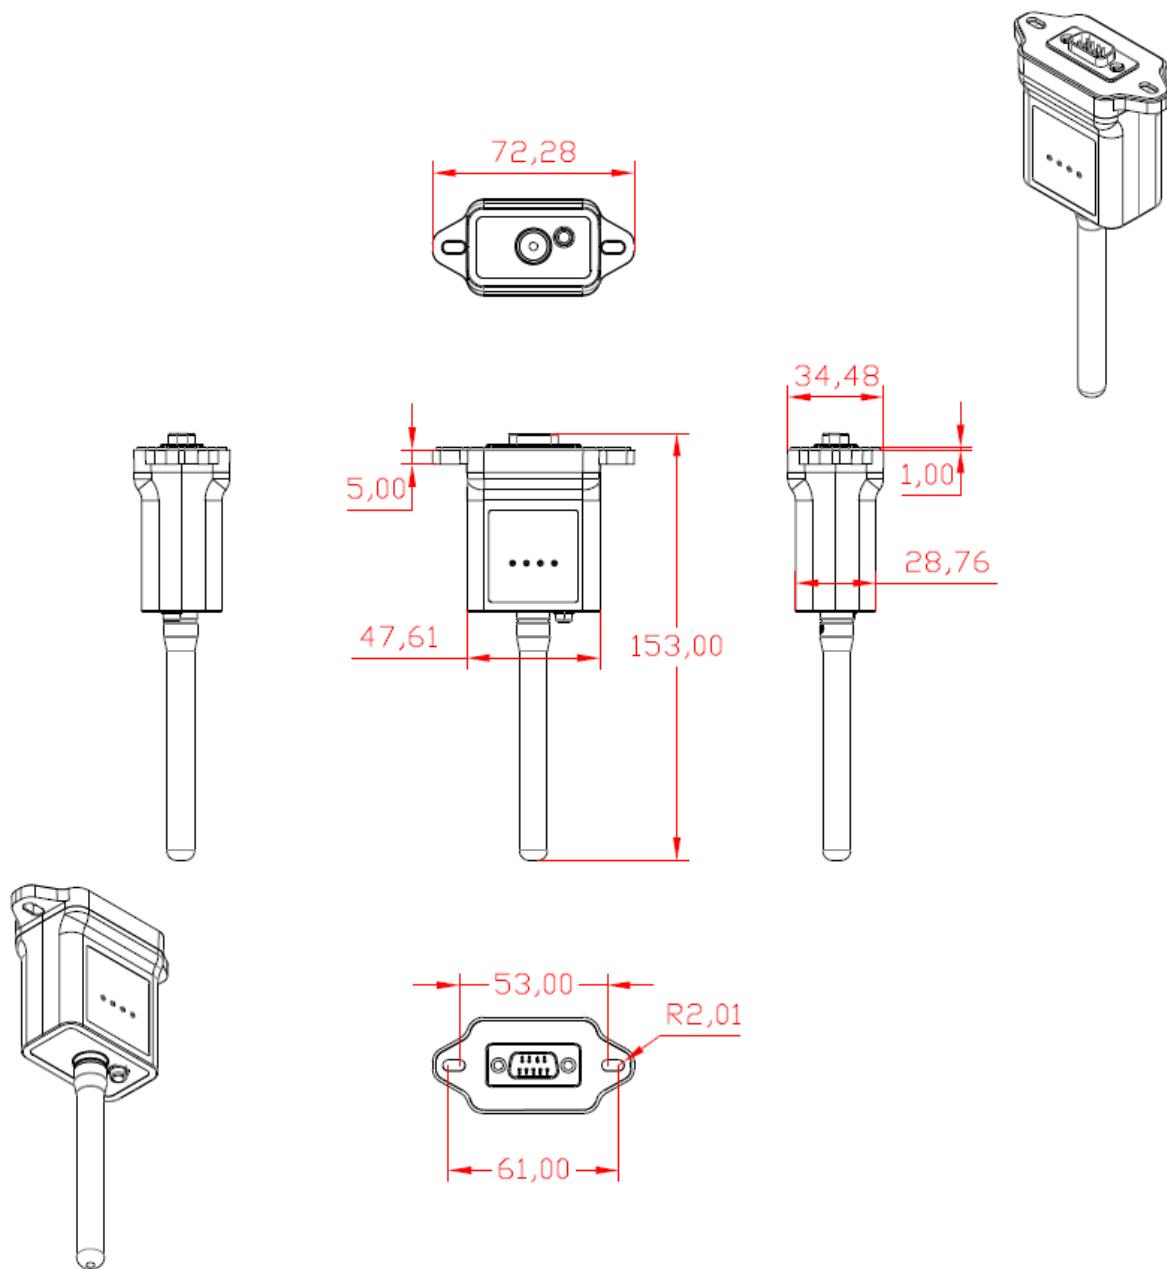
Solar Plug-SGB1-13 Mechanical Dimensions
